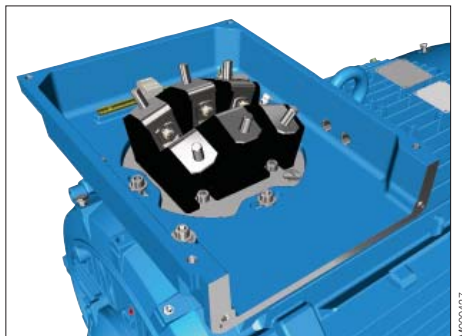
Terminal board for motor sizes 280 – 315 SM-ML.
